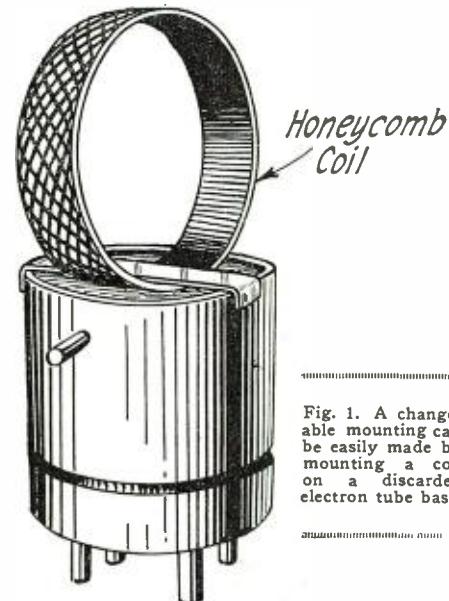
A changeable mounting can be easily made by mounting a coil on a discarded electron tube base.
